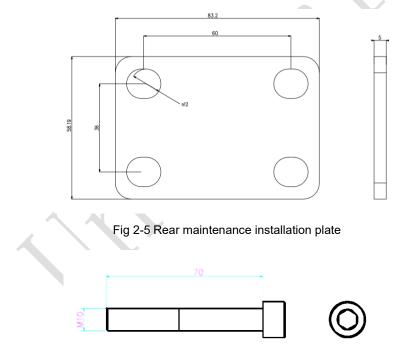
Rear installation M10×70 Inner hexagon bolt
